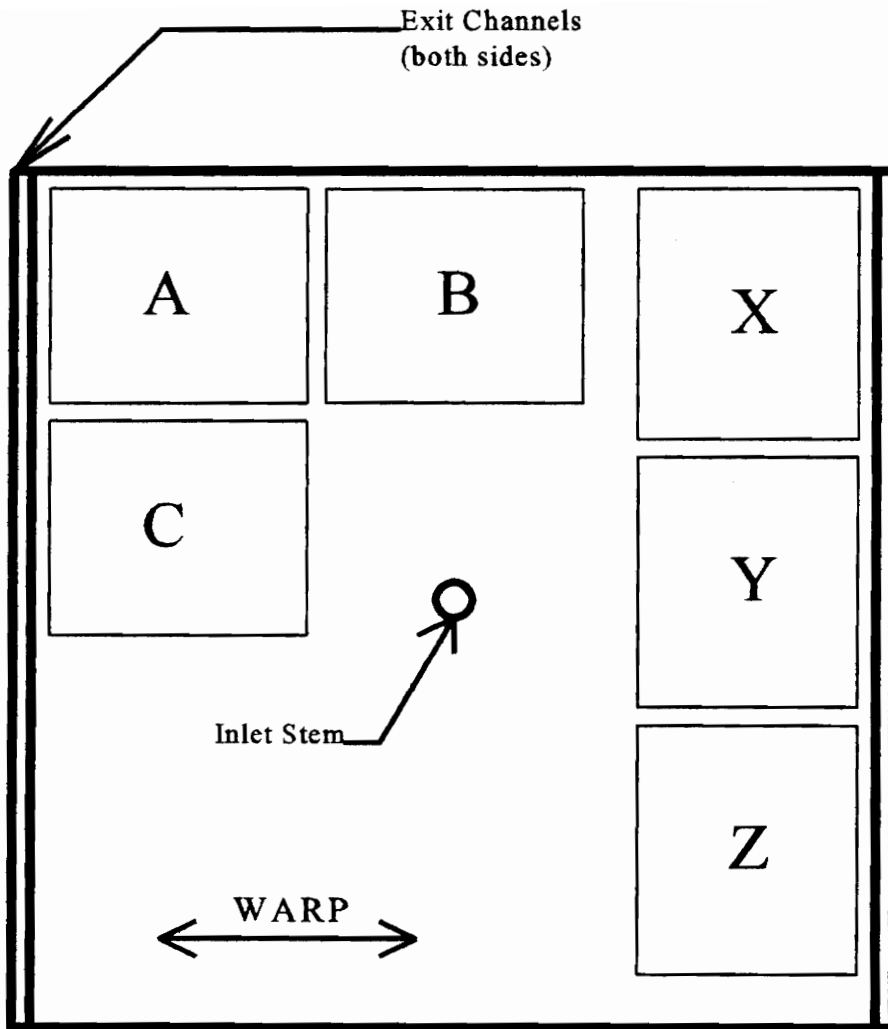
Panel Layout for Short Block Compression Test Specimens.
